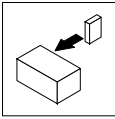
935X-V003 assembly: Control-cabinet assembly
